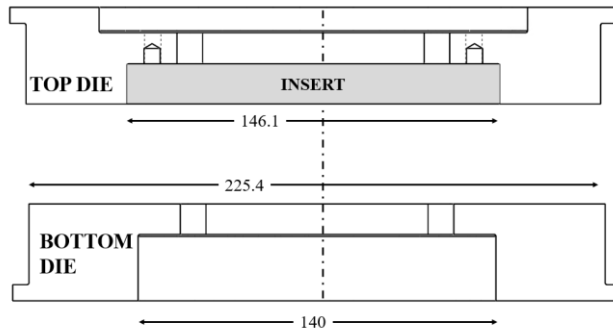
Schematic of top and bottom die (cross-section view) of new stretch bend tooling, dimensions in mm
